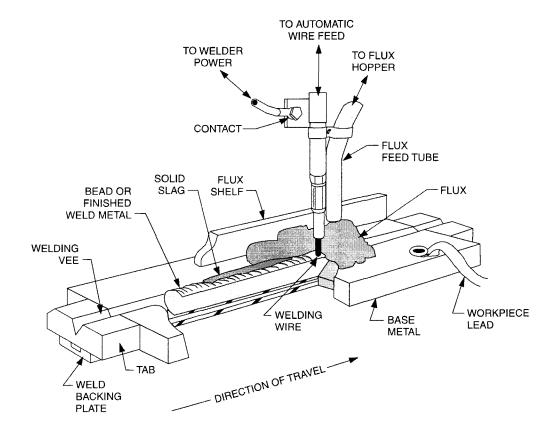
Schematic View of Submerged Arc Welding Process
